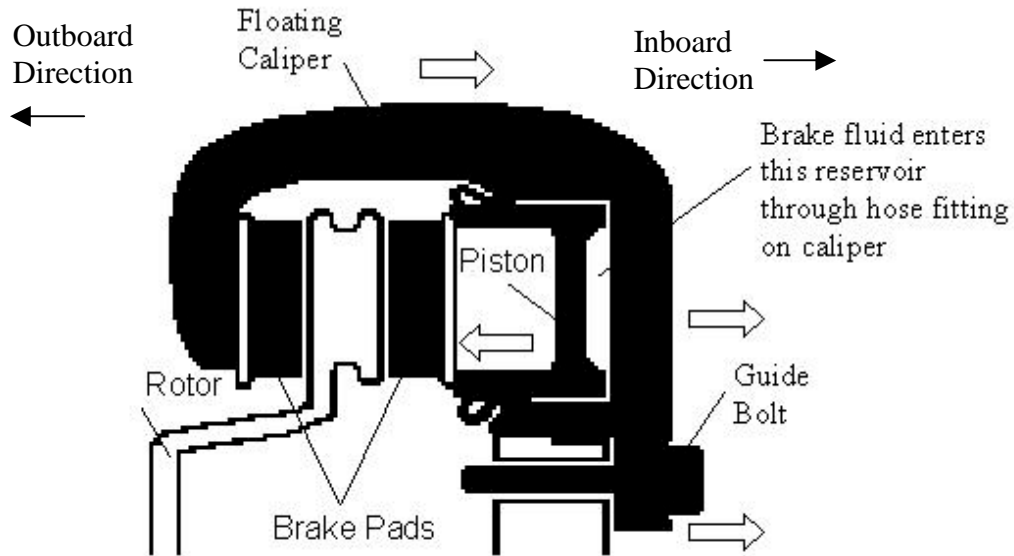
Section of a disc brake system showing the components of a “floating” caliper [5]
